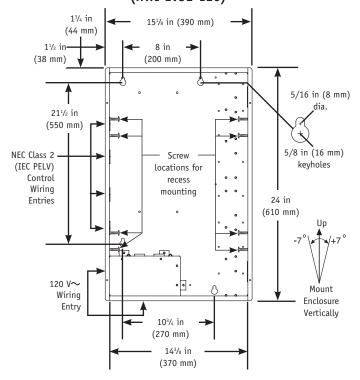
Dimensions and Mounting (HWI-LV24-120)
